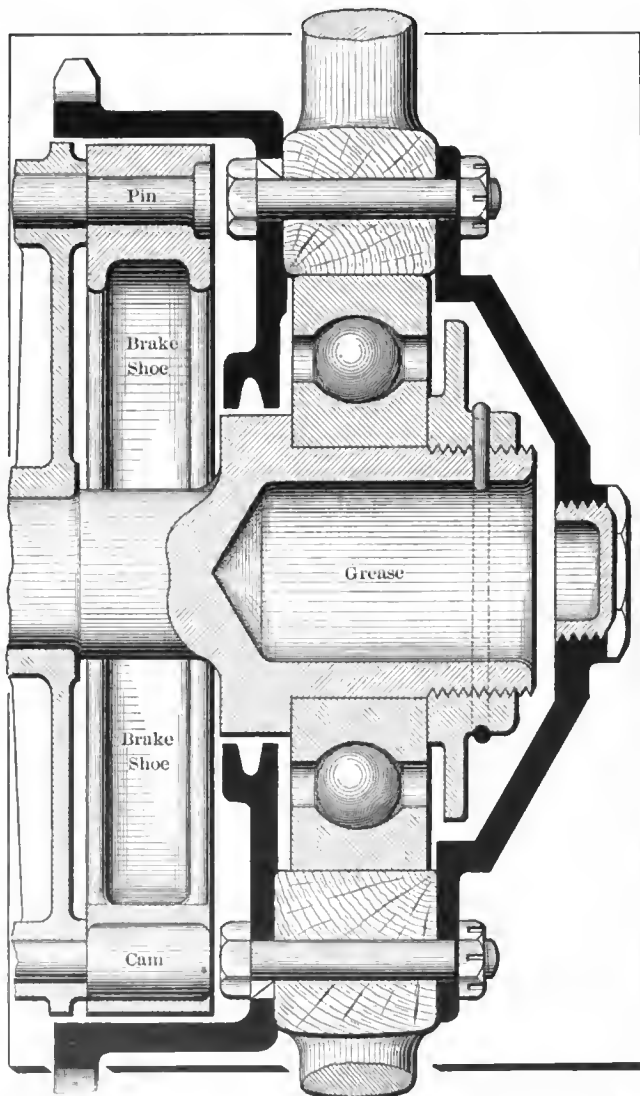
Section through rear wheel with combination brake drum and inner flange
